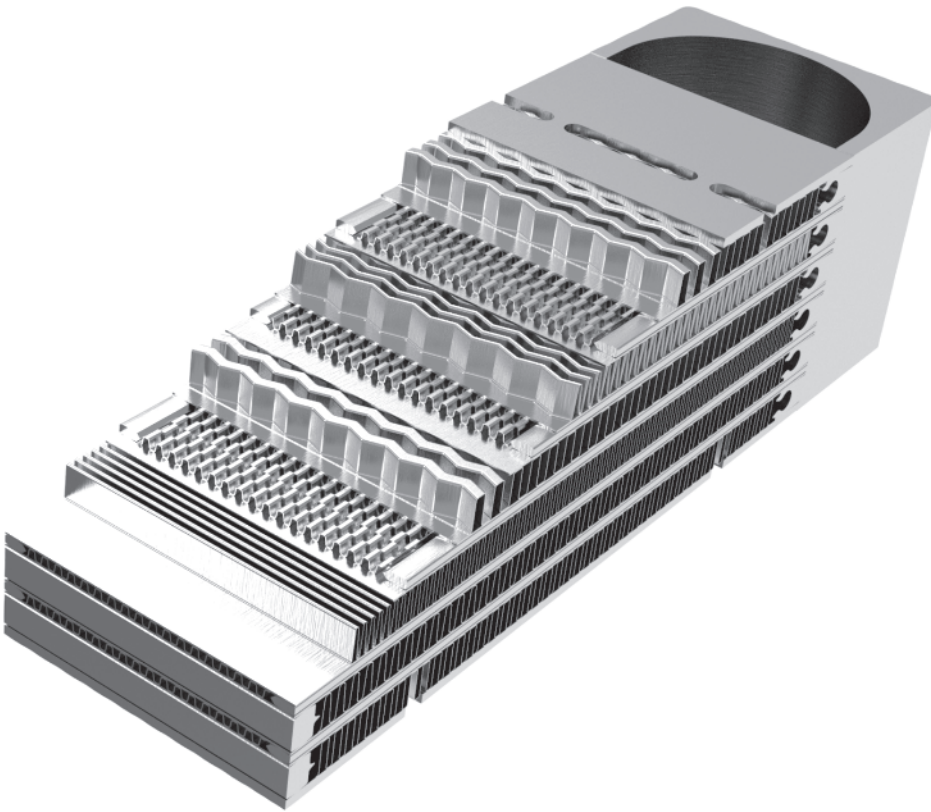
Cutaway photograph of a bar and plate heat exchanger used as a charge air cooler. Source: Courtesy of AKG.
